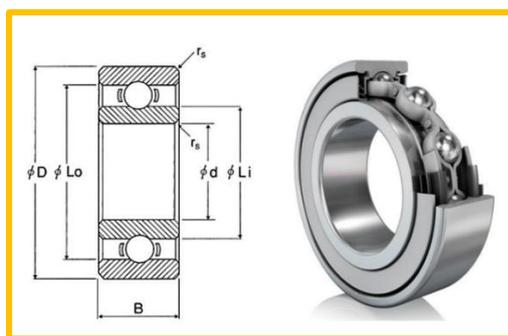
shows different component of deep groove ball bearing and their arrangement. [3]
